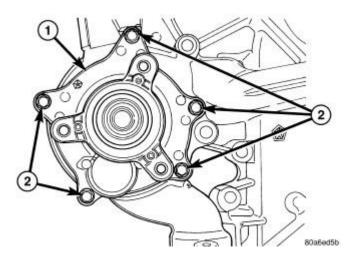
Removing/Installing Water Pump Courtesy of CHRYSLER LLC
